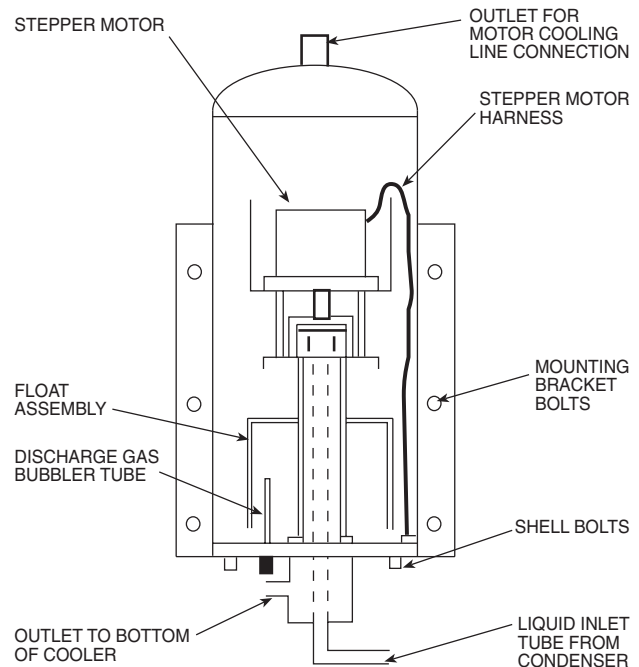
30GX,HX Cutaway View of Economizer Assembly
